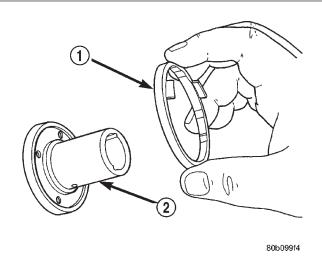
Remove Reverse Idler Gear Synchronizer Ring
